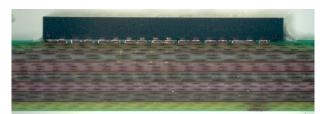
Side view of the QFN64 package (9x9 mm) assembled on a 2.4 mm thick PCB
